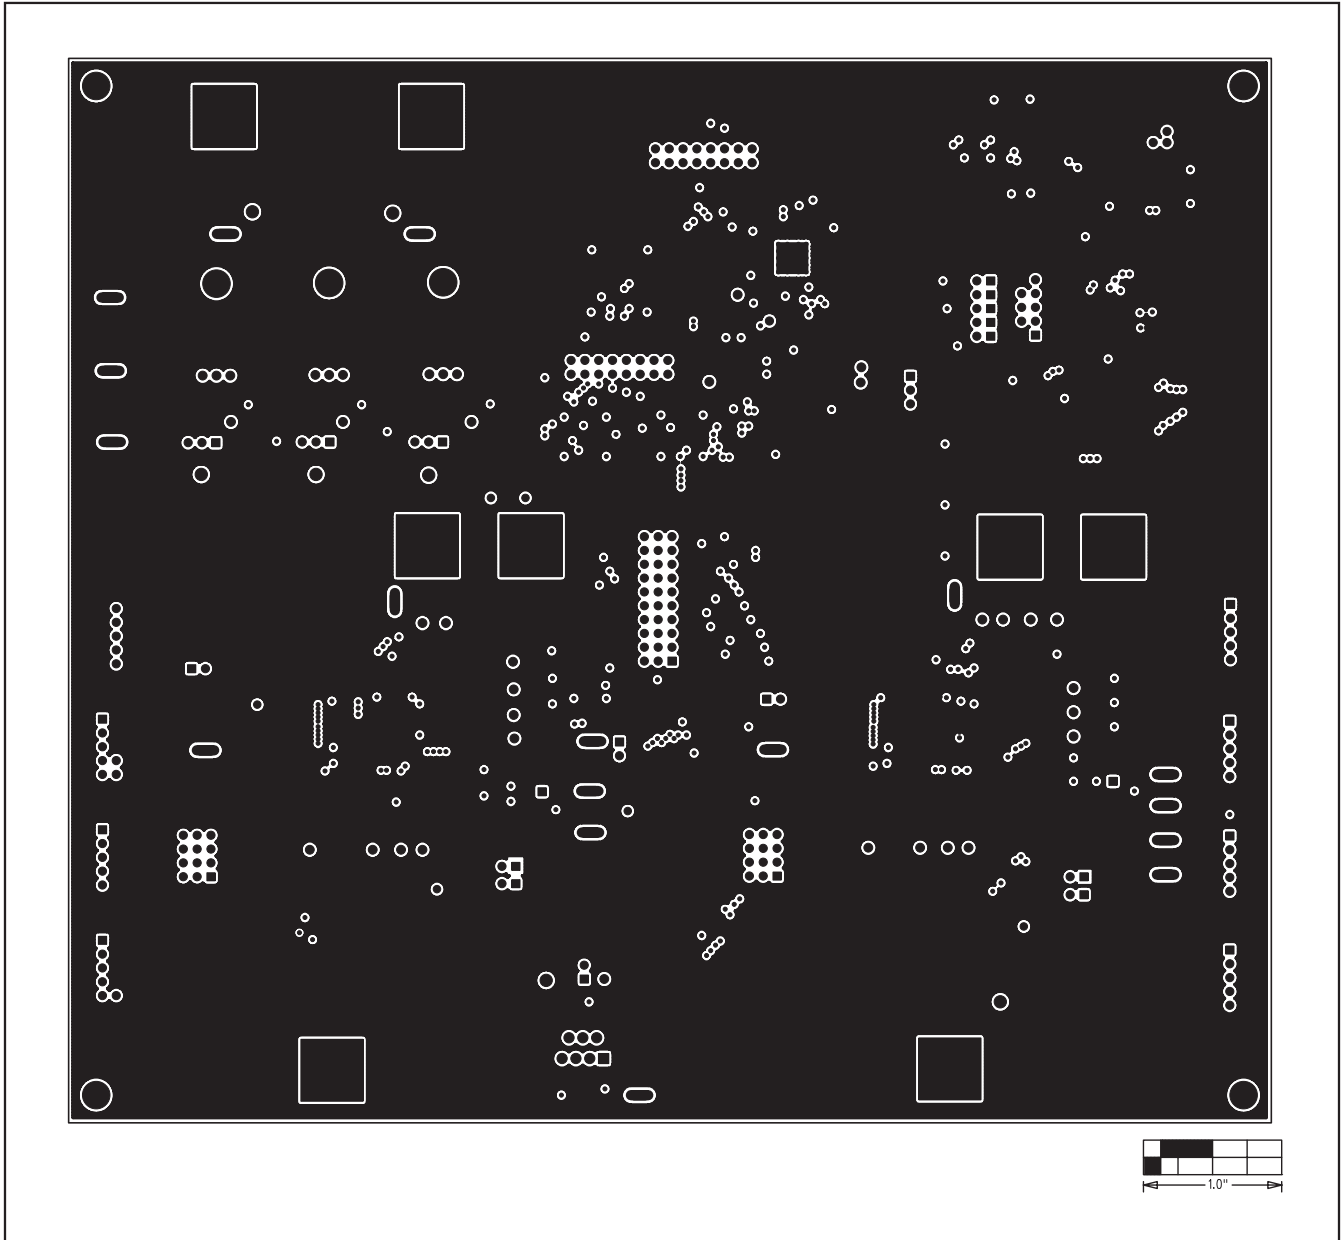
MAX9959 EV Kit PCB Layout—2nd Layer
